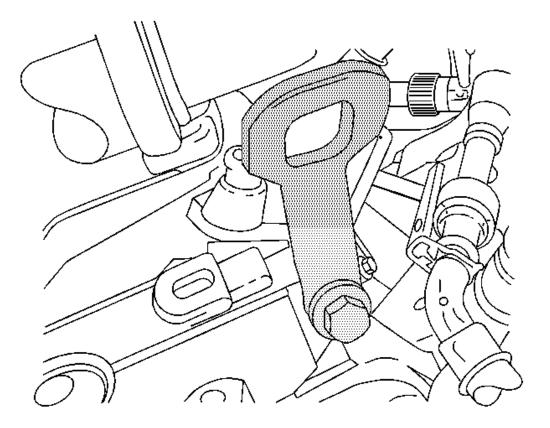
Identifying Special Tool - J-41803-9 Courtesy of GENERAL MOTORS CORP.
